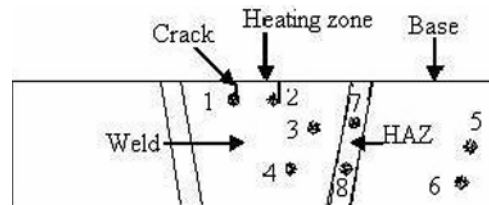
Hardness locations taken in the failed weld tube.
